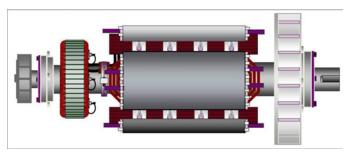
TWO BEARING ALTERNATOR ROTOR SHOWING SHAFT WITH KEYWAY FOR FLEXIBLE COUPLING AT RIGHT
